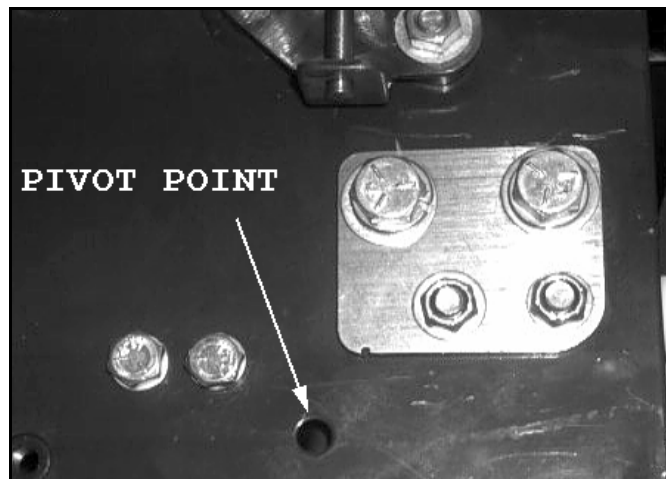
ENCLOSURE DOOR ATTACHMENT LOCATION
